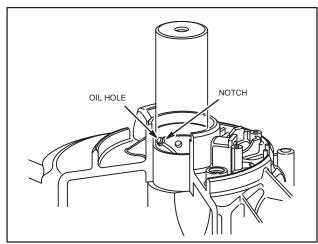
INSTALLING BUSHING MODEL SERIES 171700, 191700
